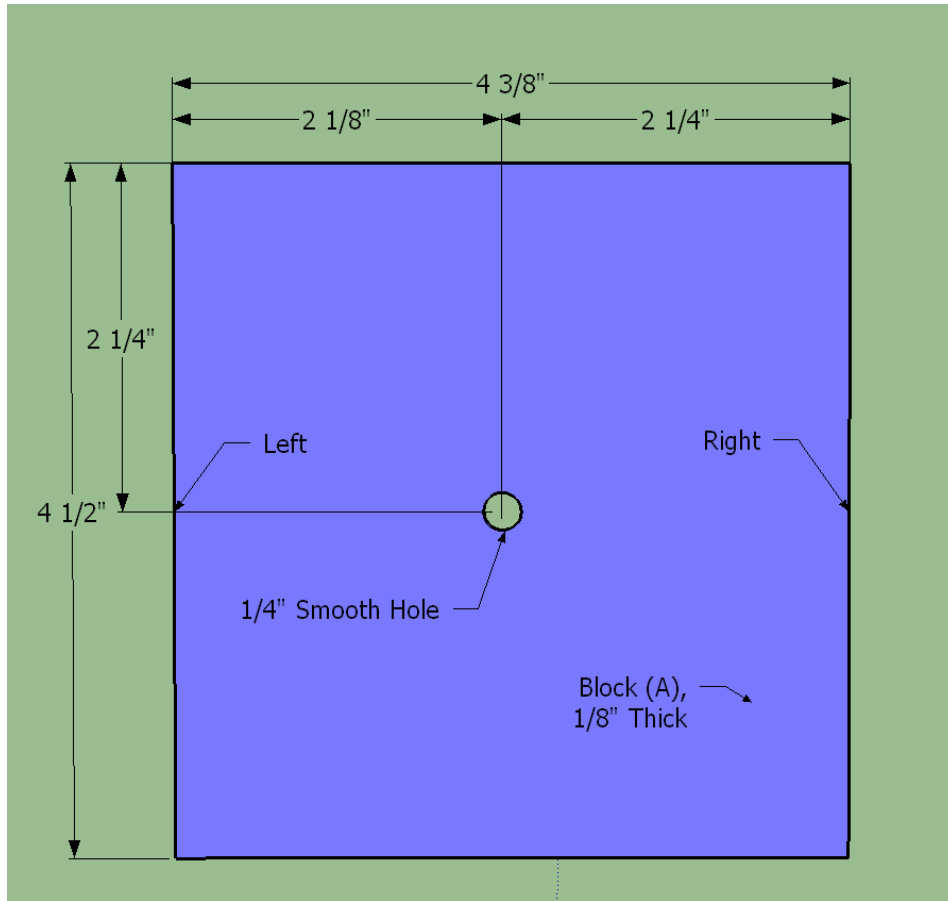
Block (A)- Sample Holder of Rectangular Specimens.
